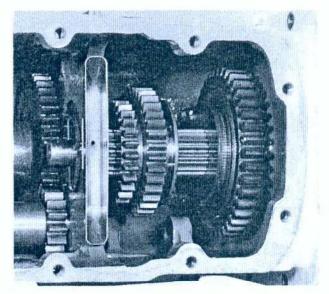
Correct Installation of Gears And Oil Trough Assembly on Main Shaft
